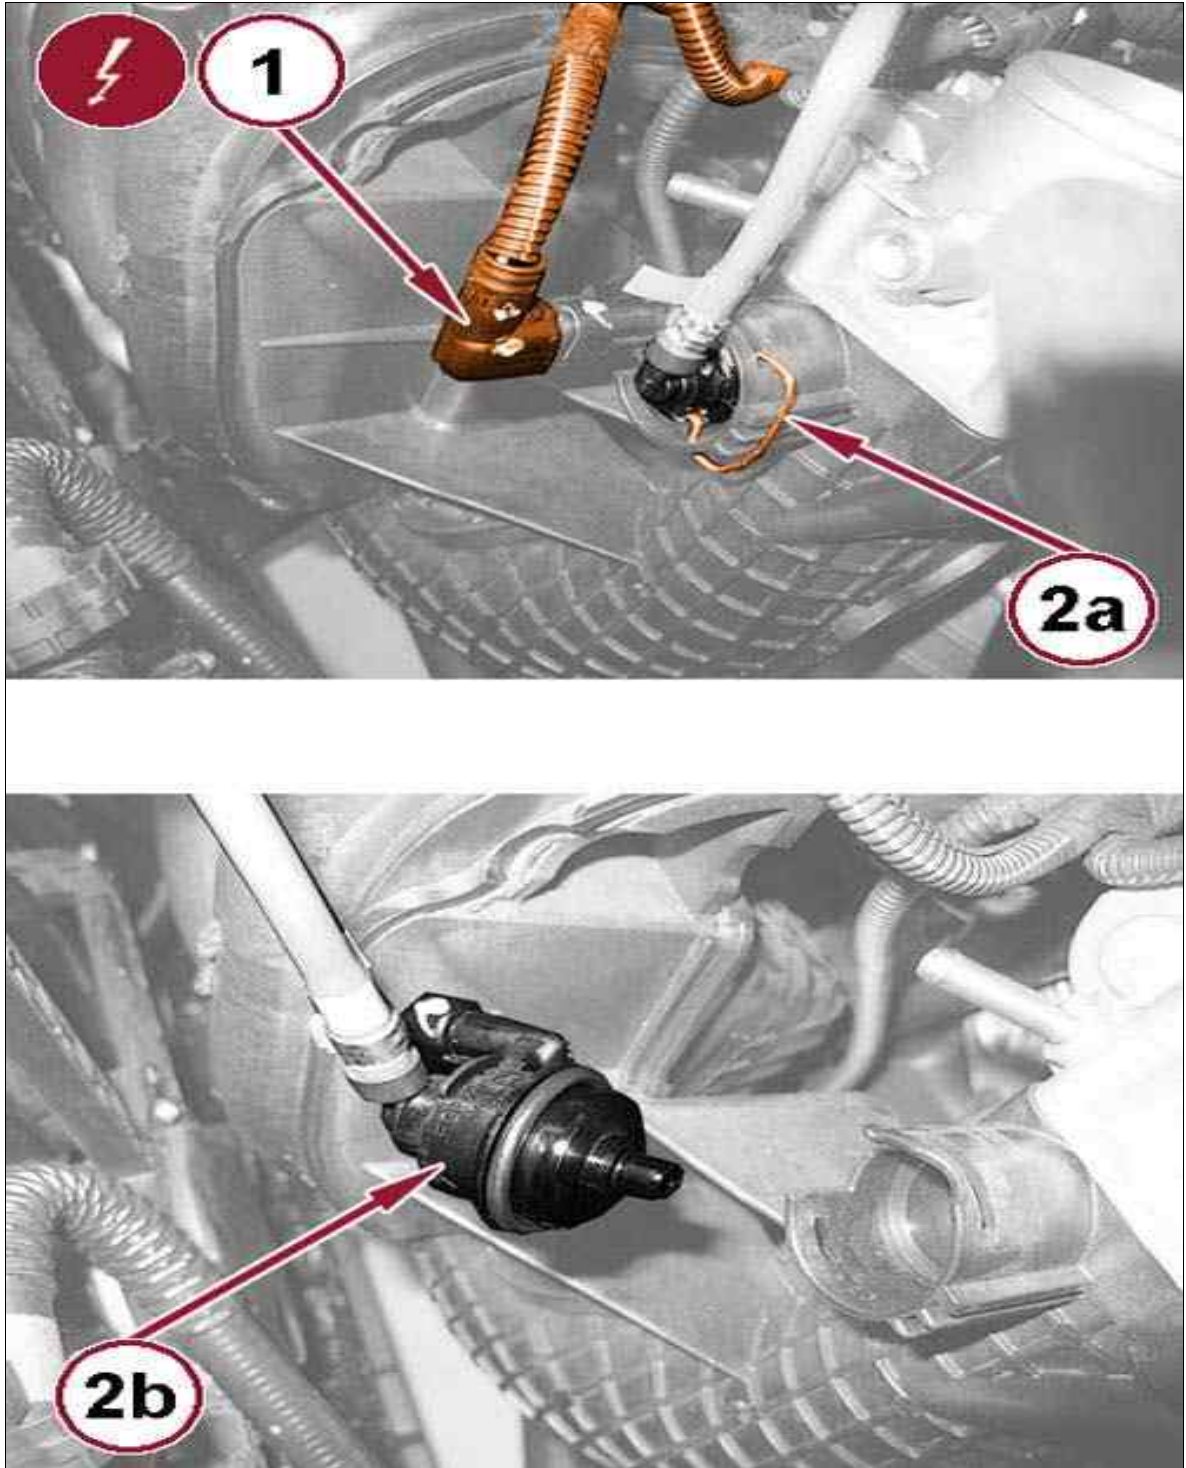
Degassing Pipe, Oil Vapor Pipe At Intake Manifold, Vacuum Air Pipe For Brake Servo & Clips
